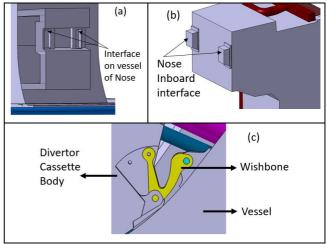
Divertor Cassette and locking systems on VV a) and b) inner locking; c) outer locking system.
